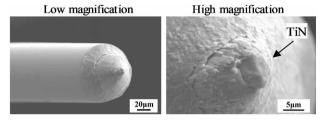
Fracture surface of extra-fine wire starting from TiN
